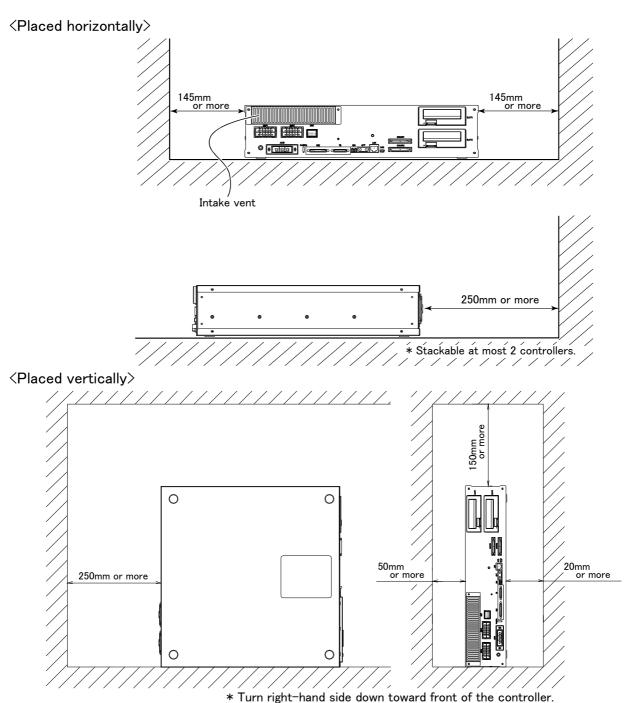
Installation dimensions (CR751 controller: Thin type)
